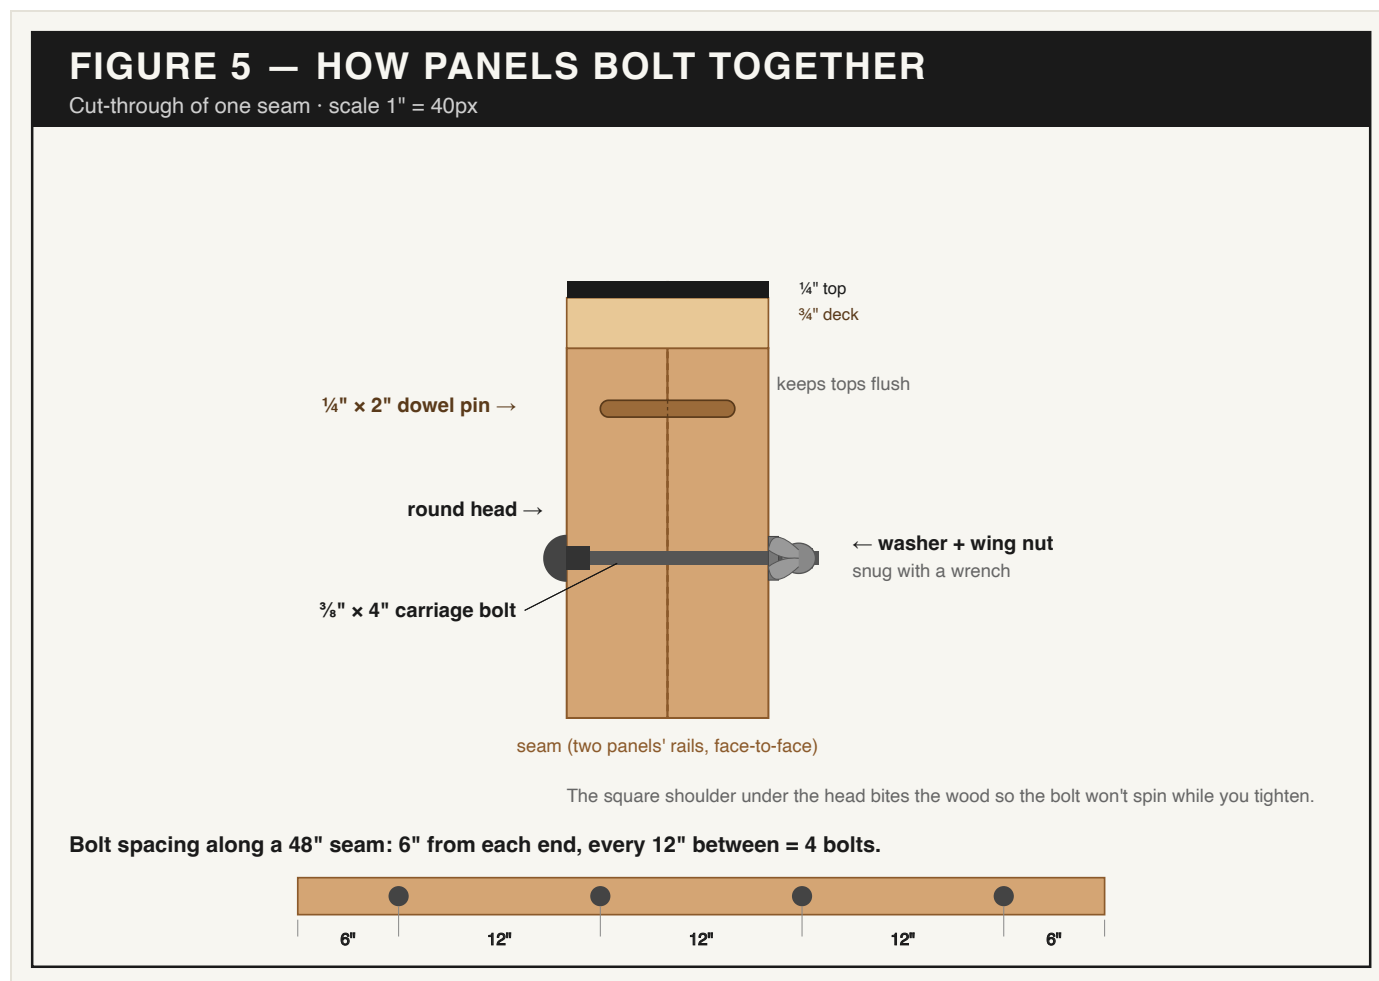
A bolted seam: dowel pin for alignment, $\frac{3}{8}$ " carriage bolt + washer + wing nut to clamp.
